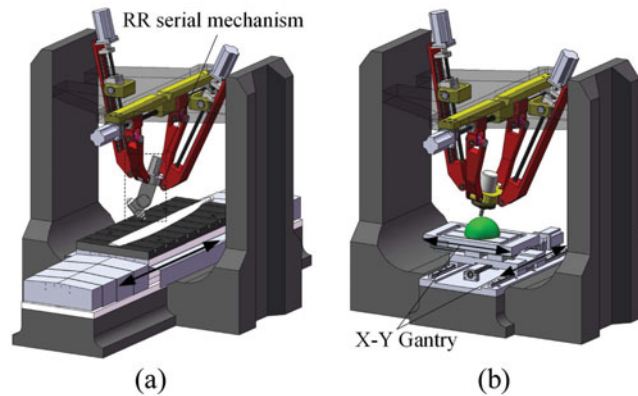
Possible applications of a Hex4 PM: (a) large-scale workpiece machining and (b) five-face milling machining.
